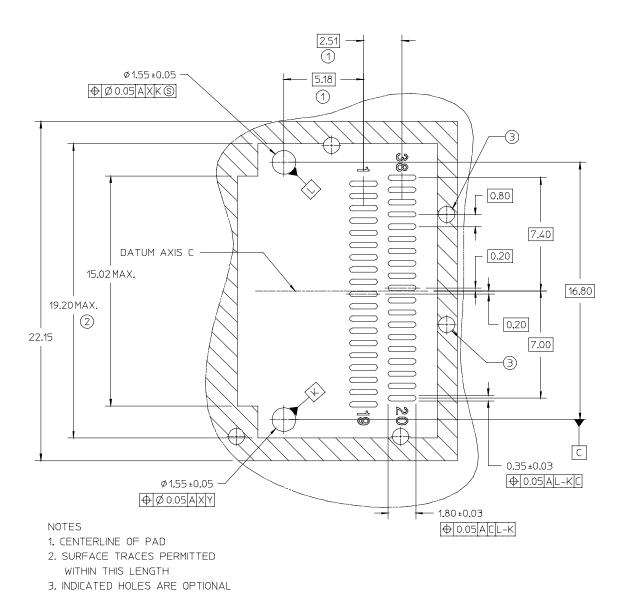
QSFP+ Host PCB Mechanical Layout, Detail Z
